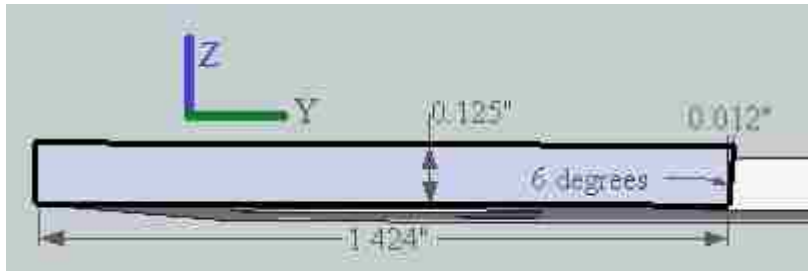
Cross sectional view of the 10x10 cm² upper trimmer aluminum plate in the in-plane dimension illustrating the thickness and lateral dimensions of the plate.
